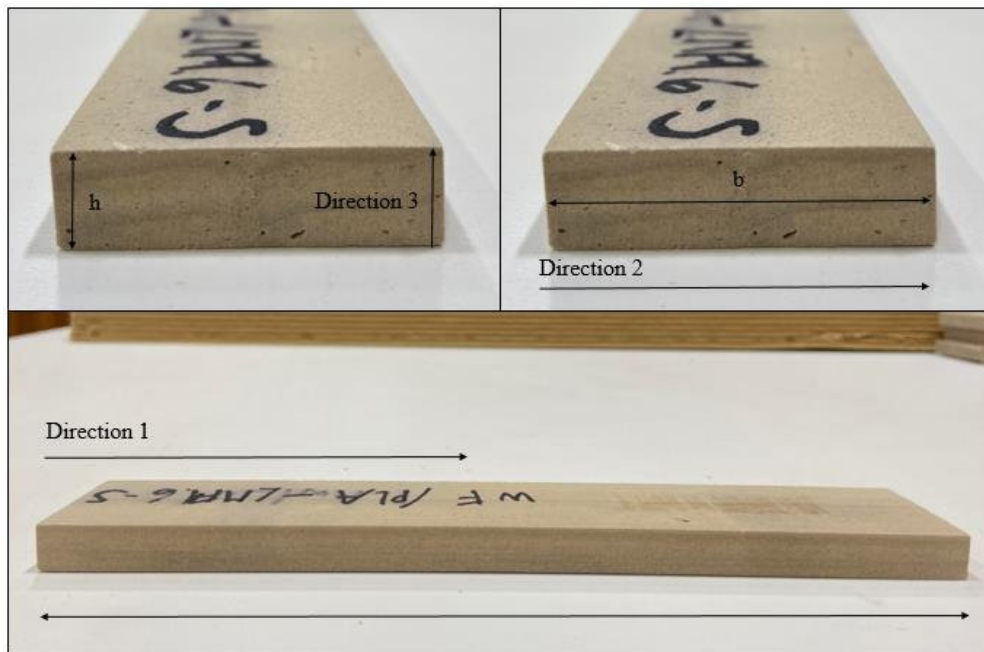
Dimensions and printing directions for set LF1.6 machined prismatic aligned in direction-1
